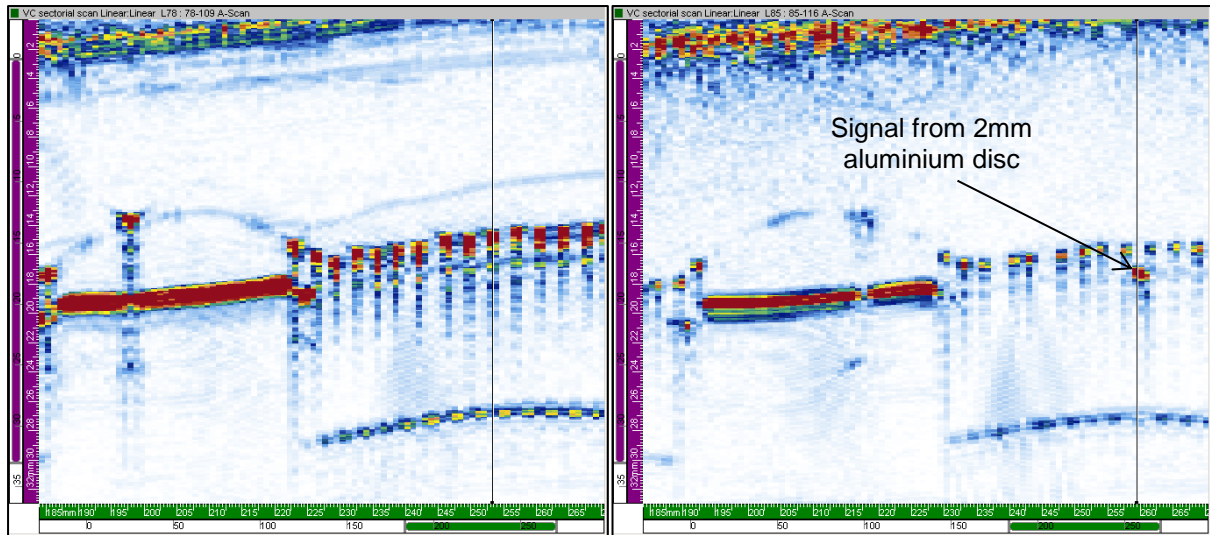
B-scan images of electrofusion welds in 180mm PE pipes: unflawed weld (left), and weld containing a 2mm aluminium disc (right).
